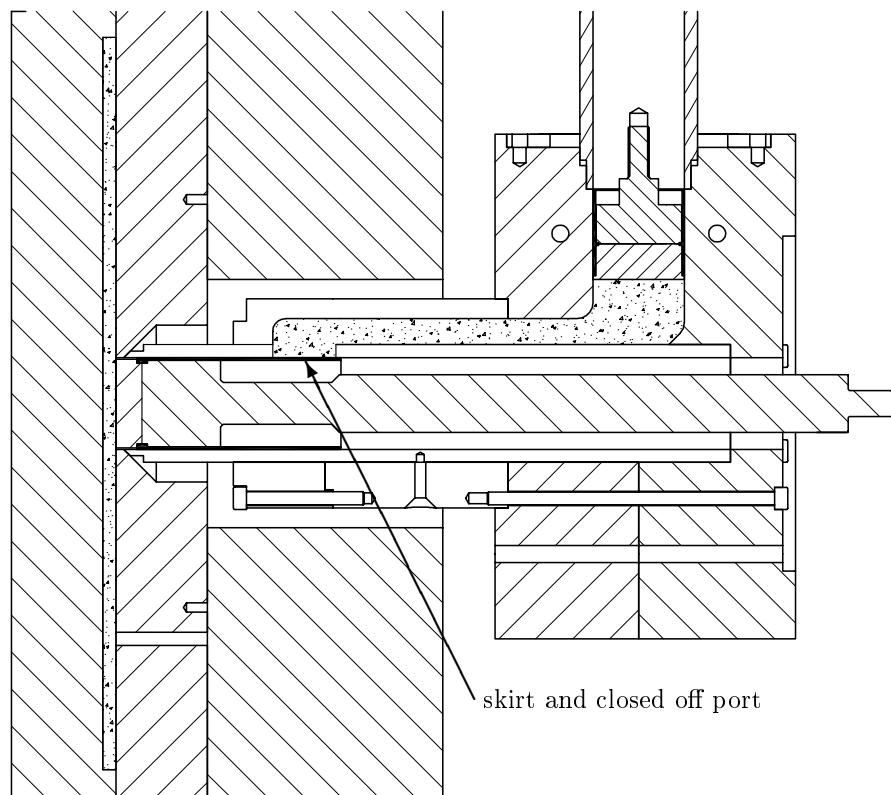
Moulding piston skirt closes off port during cooling phase
